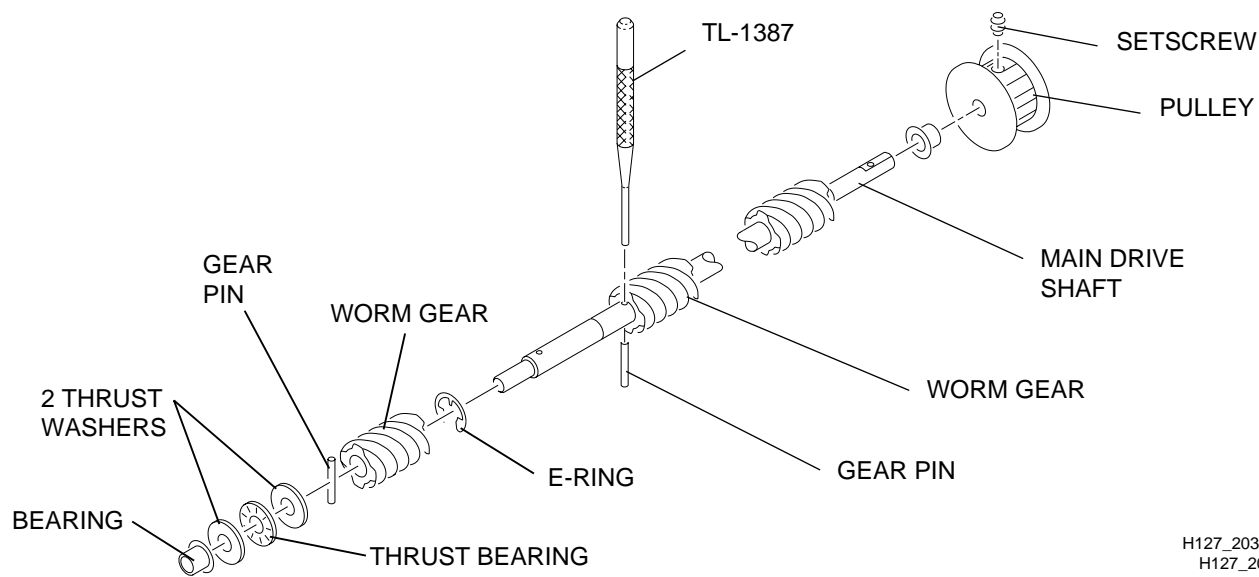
Replacement of the MAIN DRIVE SHAFT
